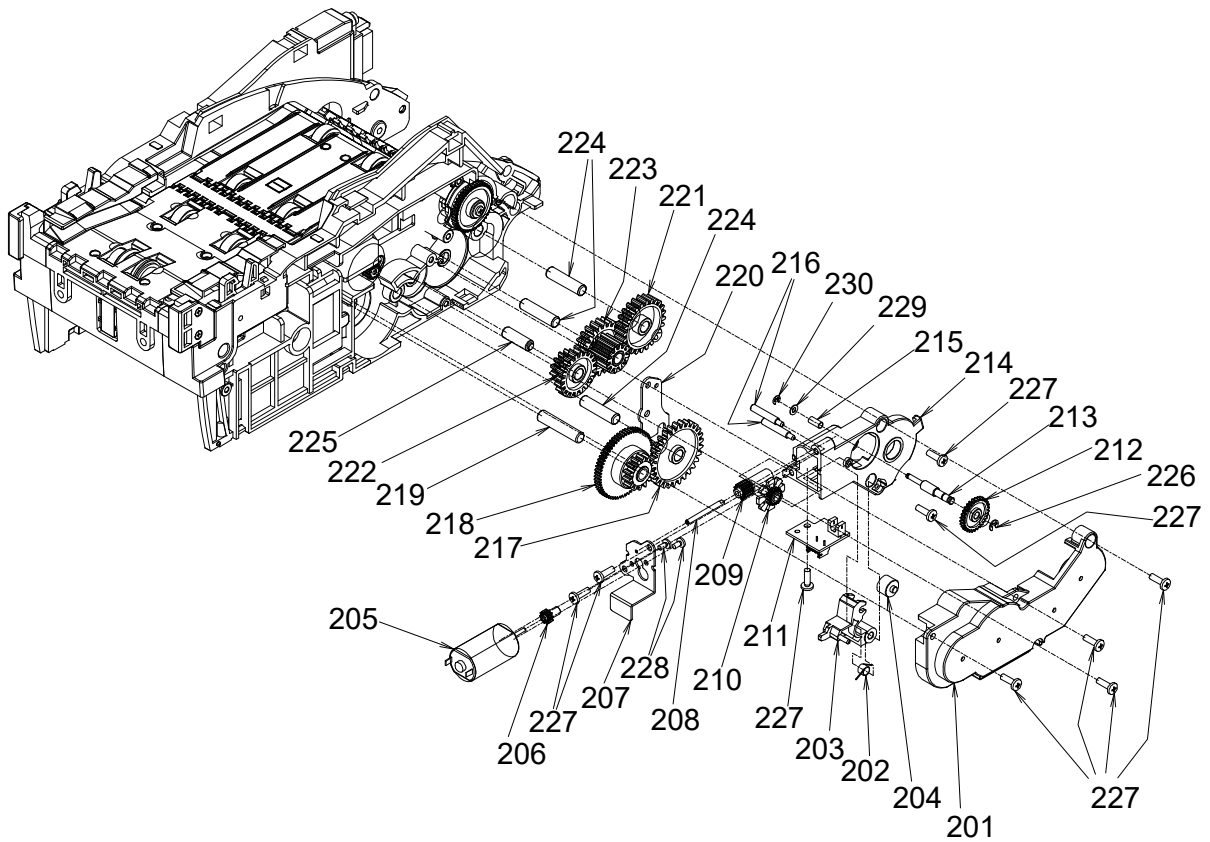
UBA Pro Transport Unit Exploded View 1
